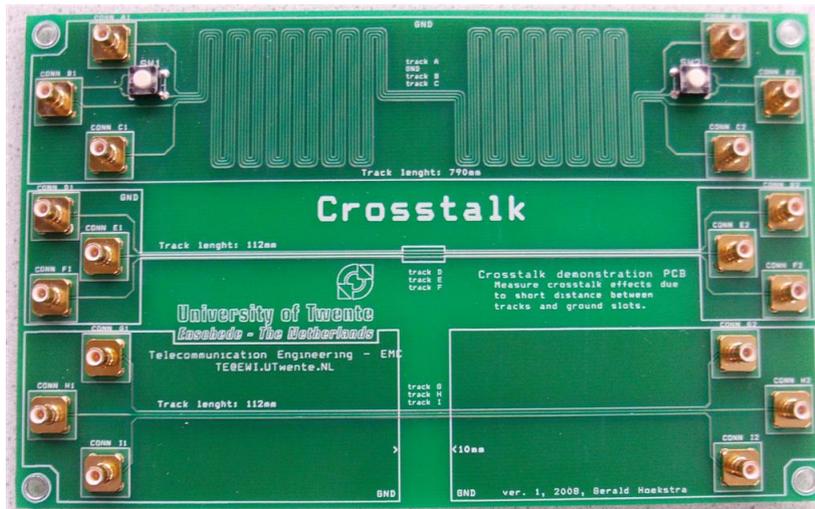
The Finished Crosstalk Layout Issues Board.
